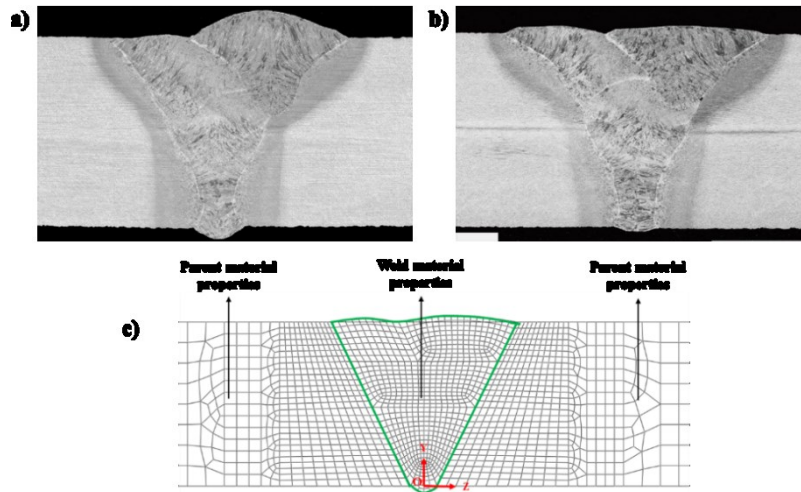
Weld cross section macrographs from butt welded plates: a) Butt-welded plate with the short weld, b) butt welded plate with the long weld and, c) weld cross section used in the FEA model.
